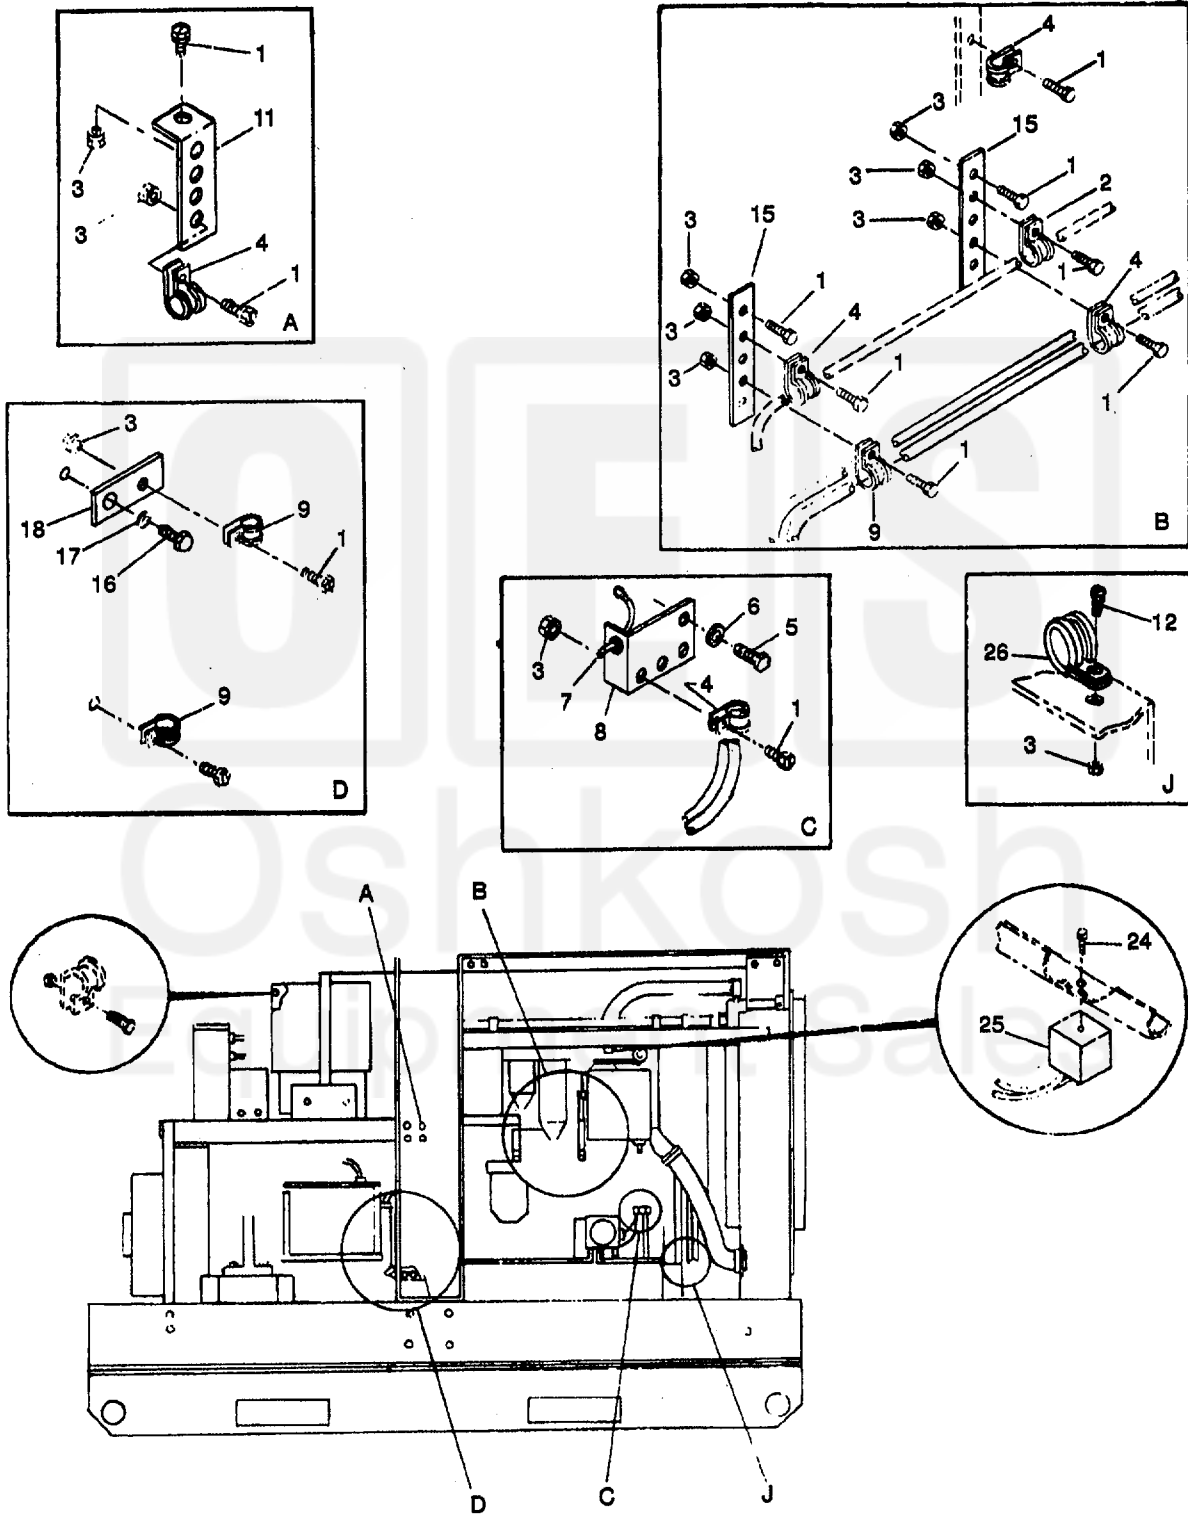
Engine Generator and Chassis Wiring Harness (Sheet 1 of 2).
